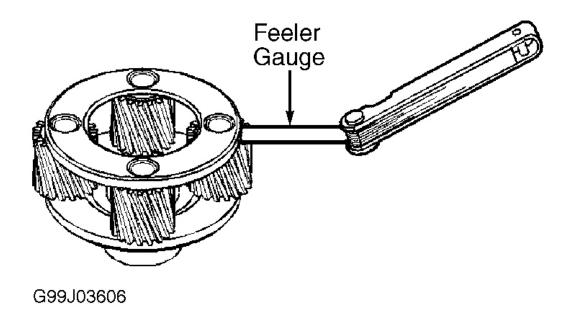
Measuring Input Carrier Pinion Gear End Play Courtesy of GENERAL MOTORS CORP.
